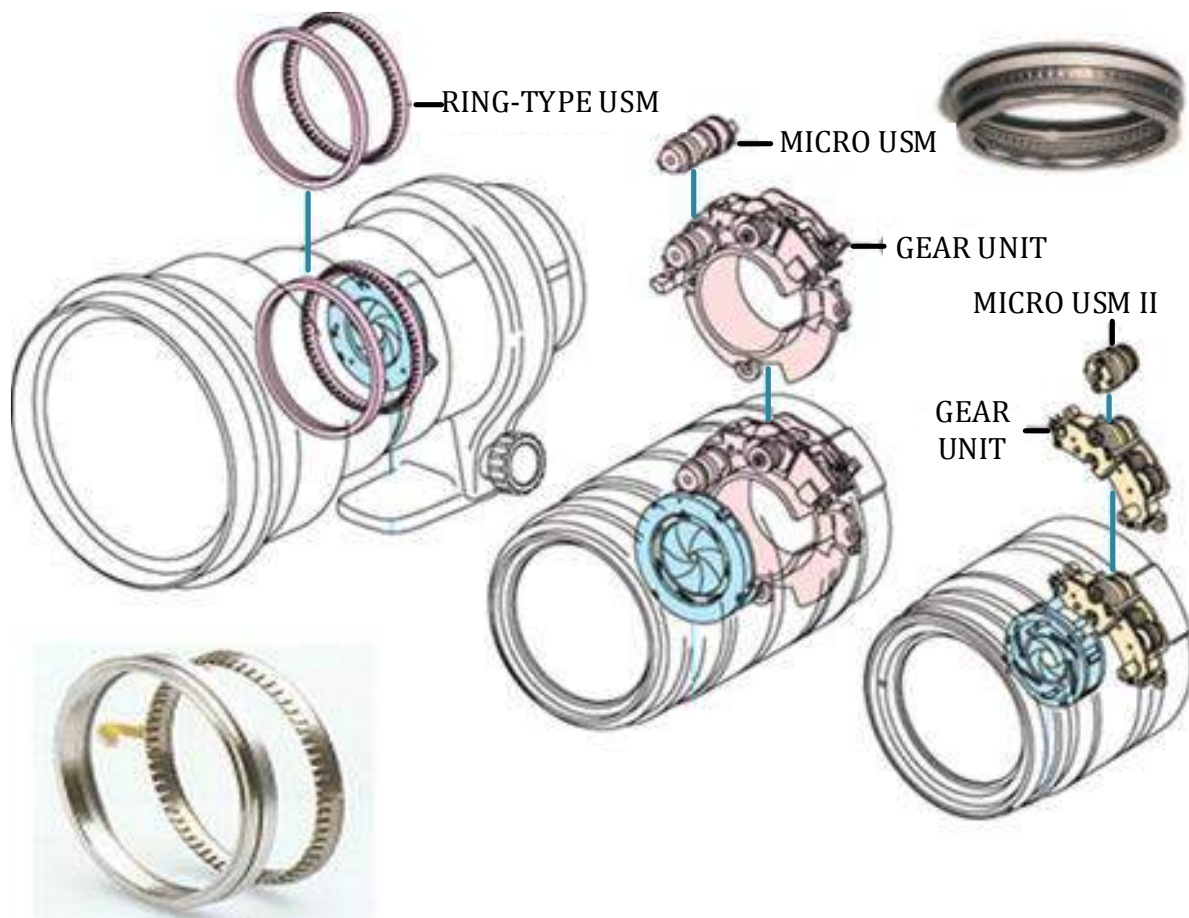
The three types of USM motor used in Canon cameras [82]
